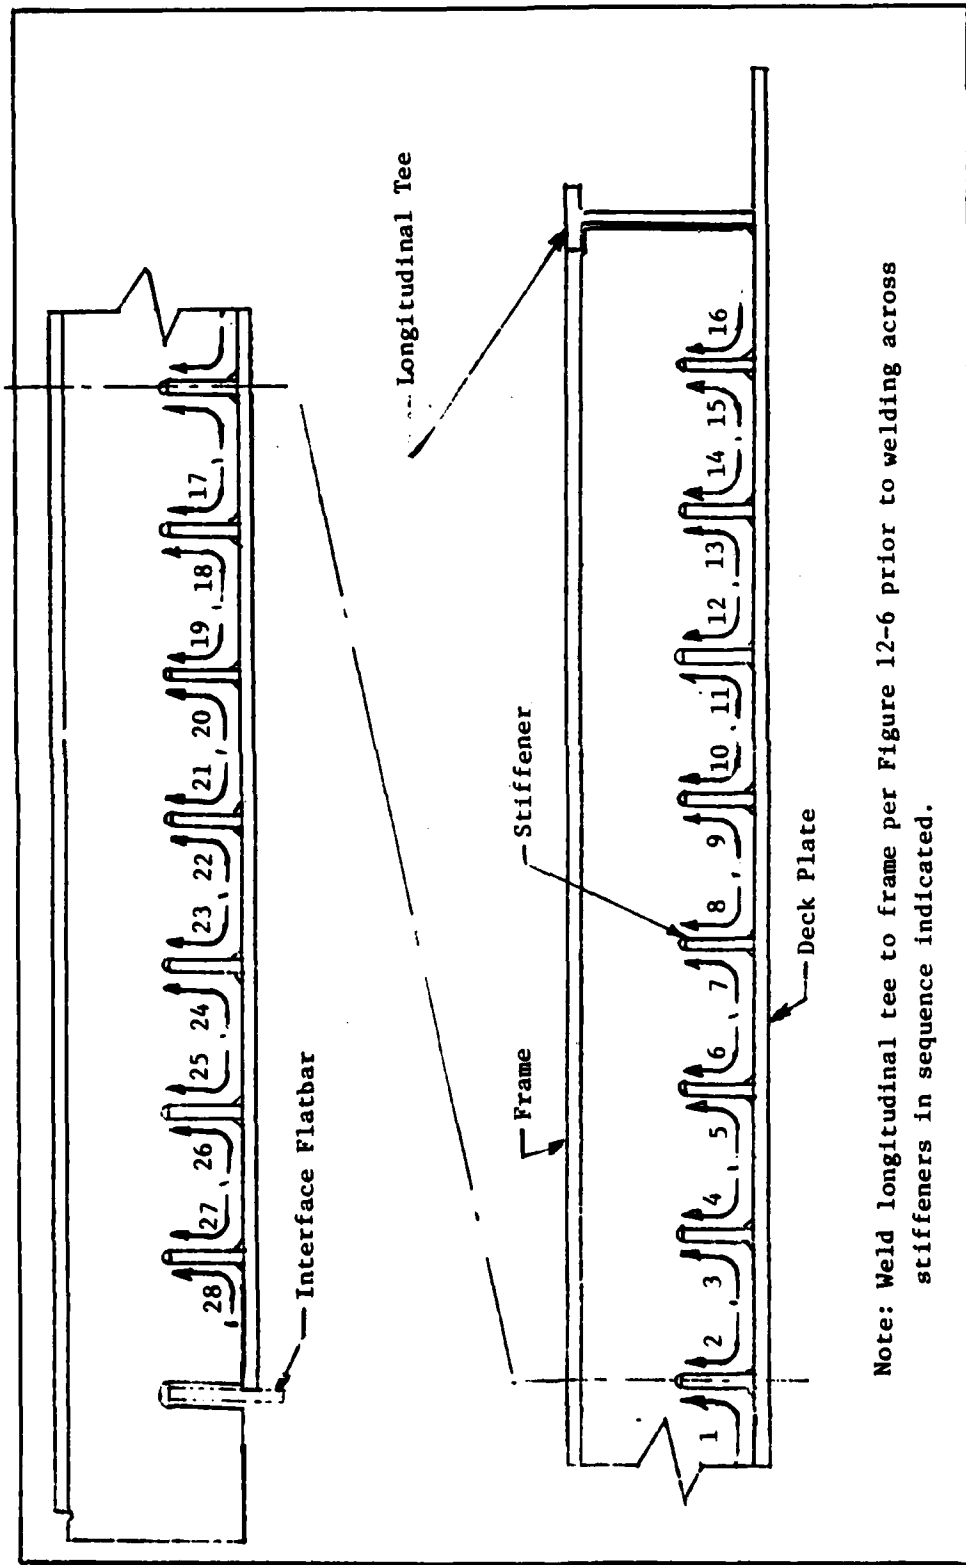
Detail Welding Sequence - Frame to Stiffened Deck Panel.
